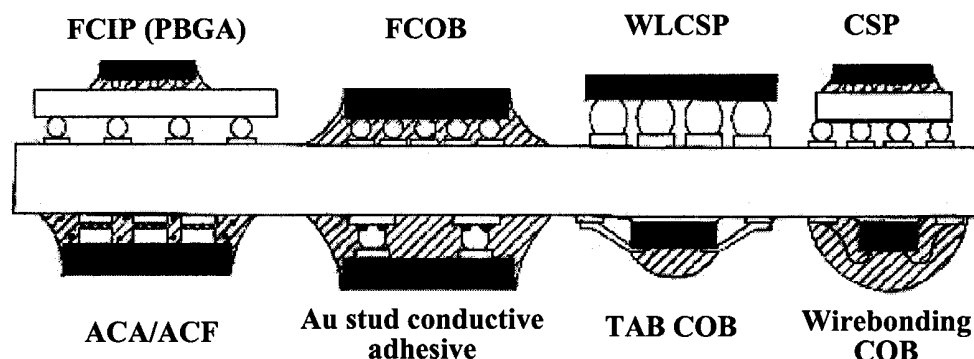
Examples of several applications in packaging technologies on a PCB.
